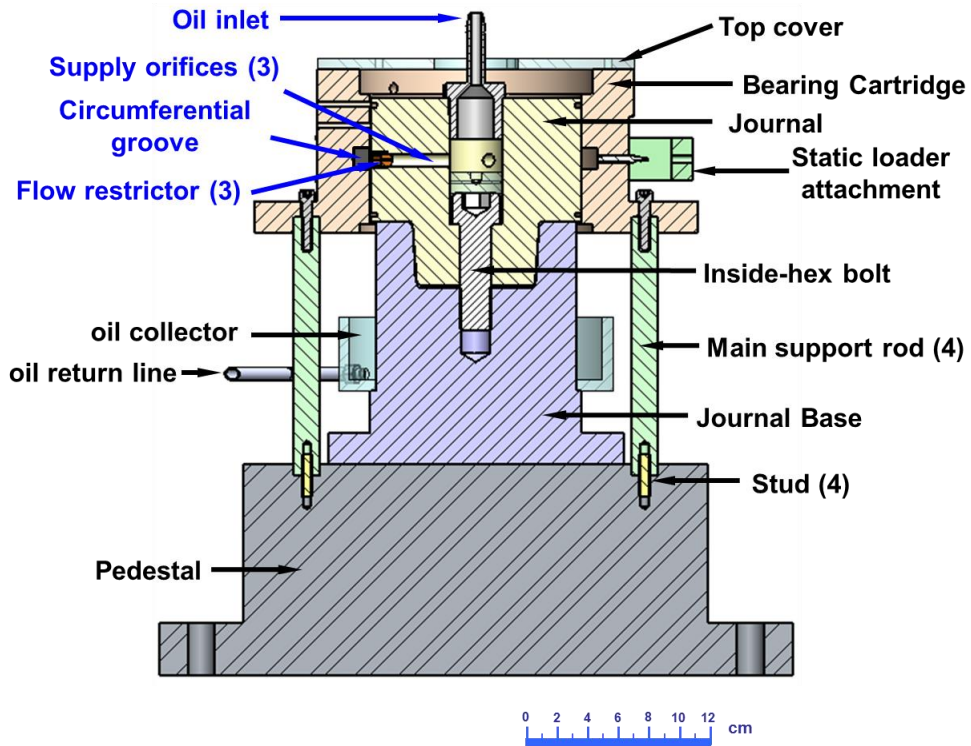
shows a cross section view of the test rig assembly with the journal installed and Table 1 lists the basic dimensions of the SFD. A journal with outer diameter of 127 mm (5 in) is installed on a journal base that is firmly affixed to a pedestal. The clearance ( $c$ ) between the BC and the journal creates the lubricant film lands  $c=0.251\text{mm}$  (9.9 mil).
